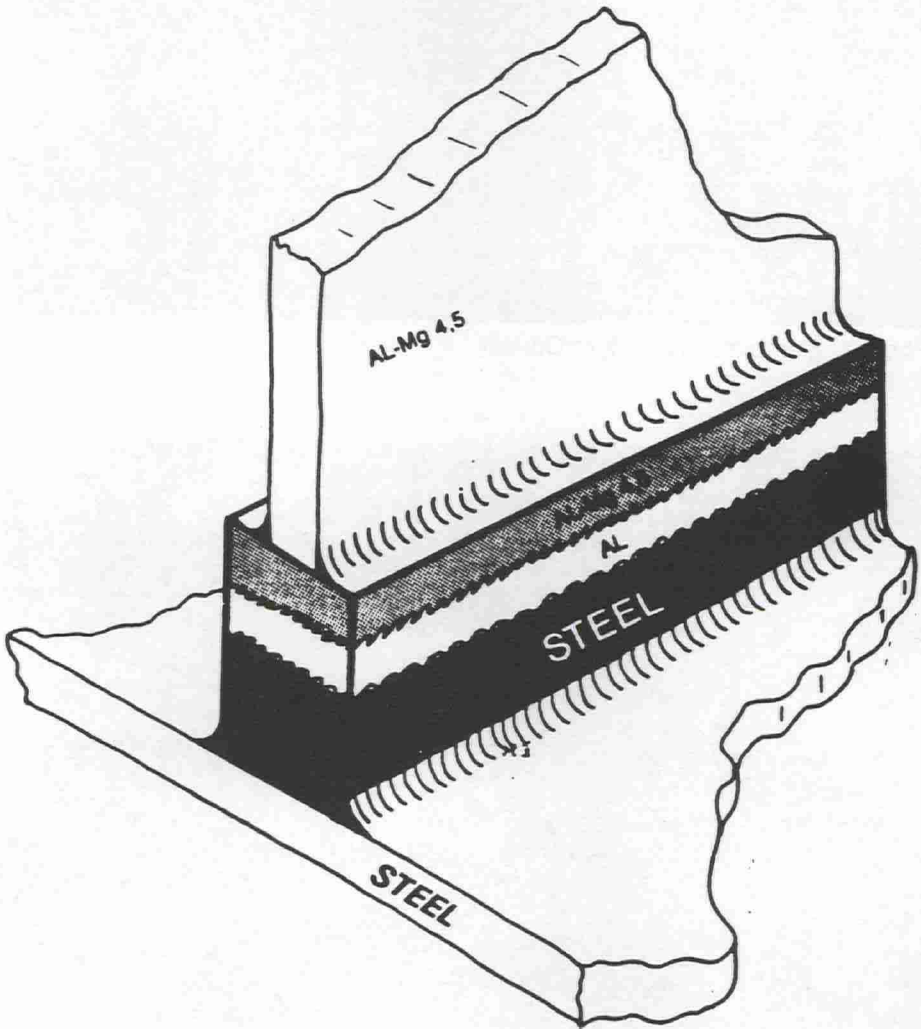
TRI-CLAD STRIP FOR WELDING ALUMINIUM TO STEEL
